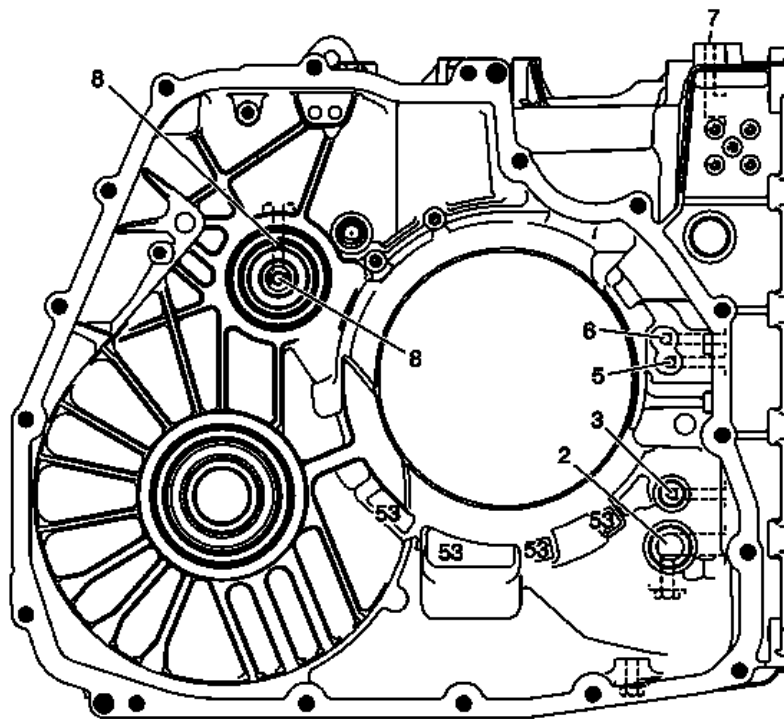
A/Trans Case Assembly-- Torque Converter and Differential Housing Side
